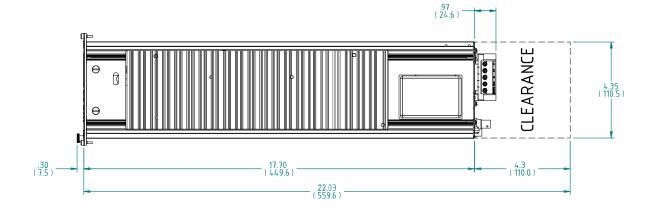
DCX F-EIP Power Supply Dimensional Drawing (Large)
